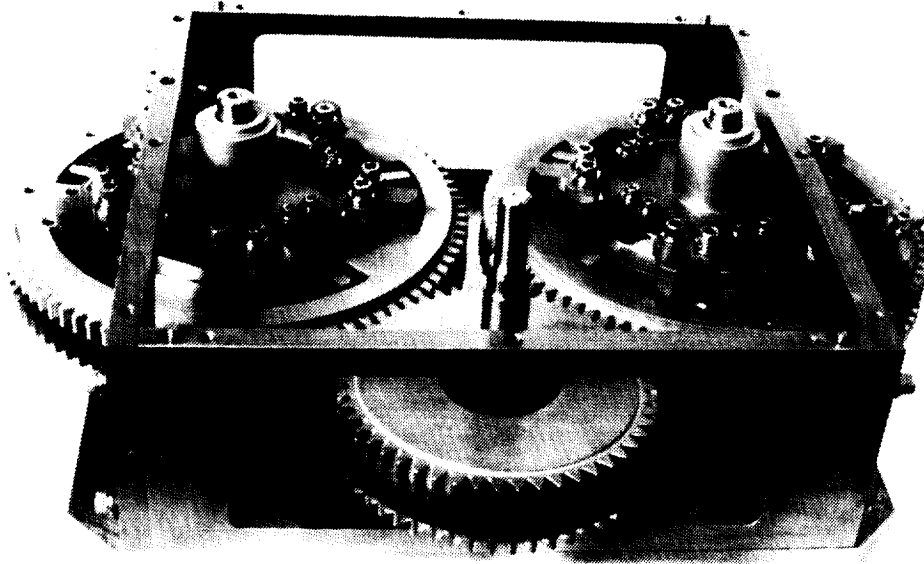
GEARBOX WITH TOP COVER REMOVED
